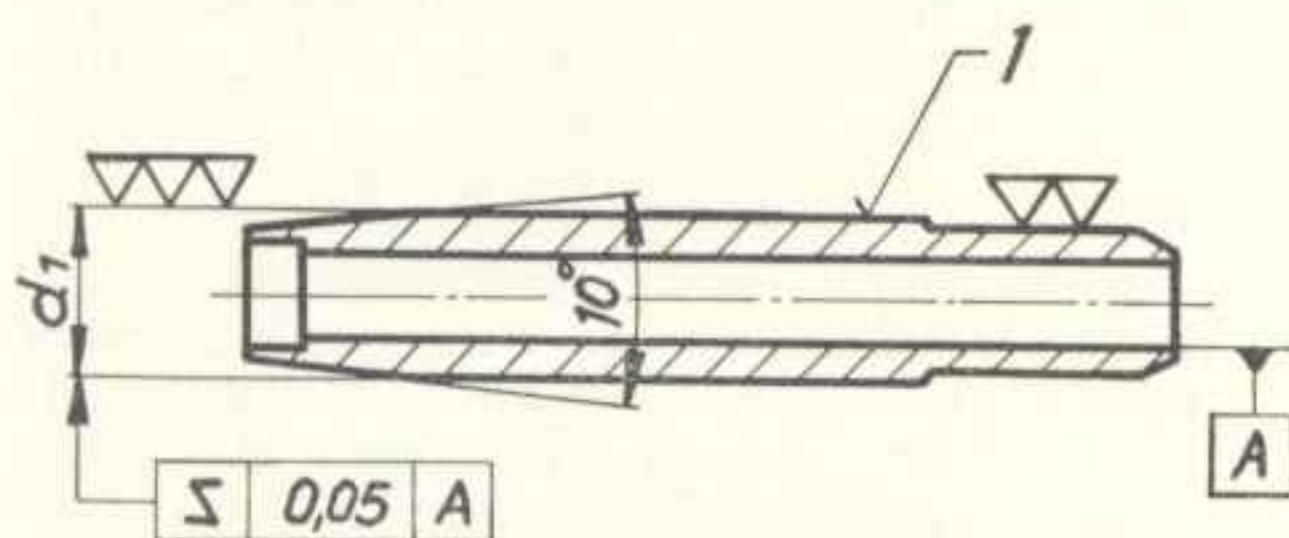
A small, dark, rectangular object, possibly a component or part of a machine, shown in a technical drawing style.
